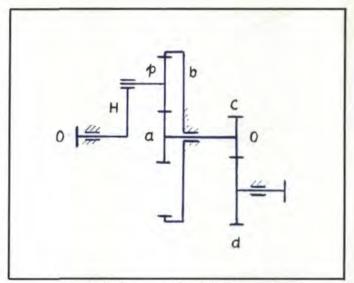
Moving-axis gearing & fixed-axis gearing.
